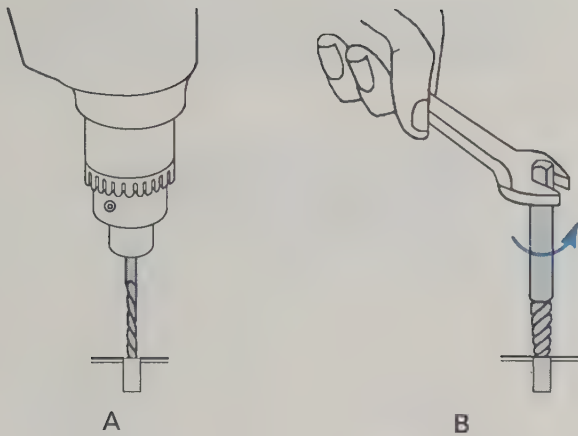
Removing a broken bolt with a bolt extractor. A—Drilling hole in broken bolt. B—Extractor is inserted in hole and turned counterclockwise with wrench to “back out” broken fastener.
